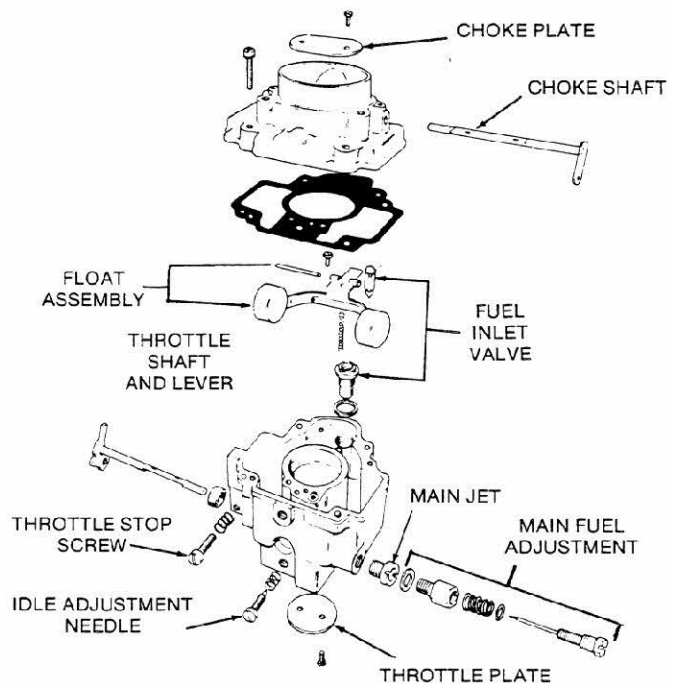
DOWNDRAFT LUA CARBURETOR ASSEMBLY
